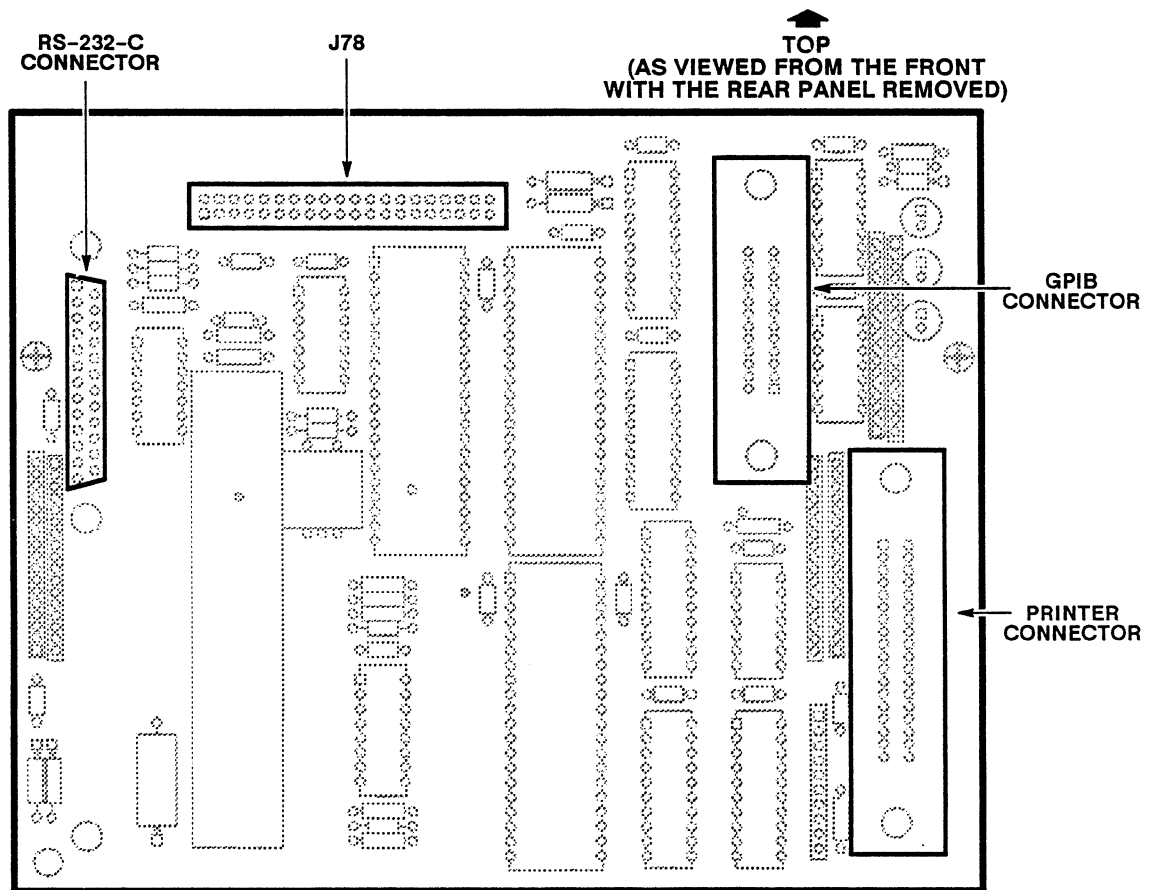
Removing and Replacing the A12 Rear Panel Assembly
